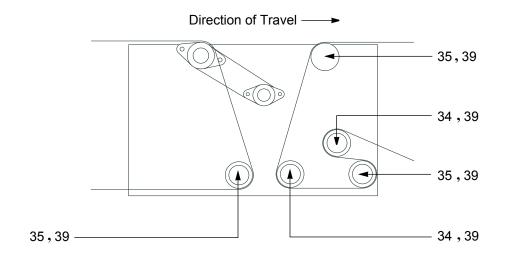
Interface Diverter with Take-Up & Idler Rollers (Front View)
